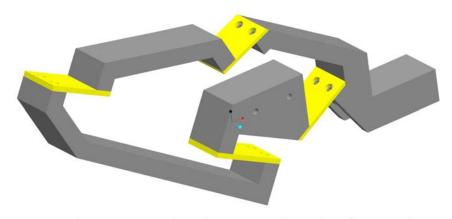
Exploded Assembly Drawing of Prototype Compliant Synchronized Recline
